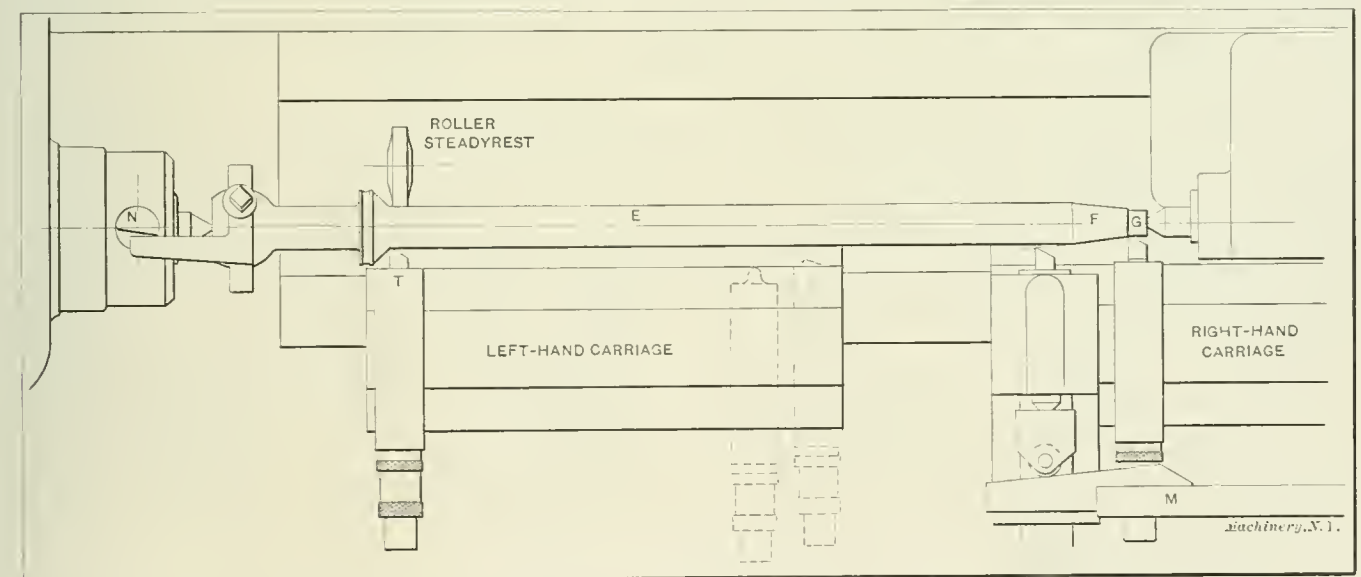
Tool Arrangement for Second Operation on Propeller Shafts
